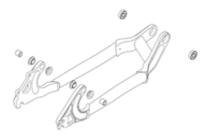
Chainstay (5) assemble with main pivot bearings (7), rear pivot bushings (22) and rear bushing inserts (23), exploded
